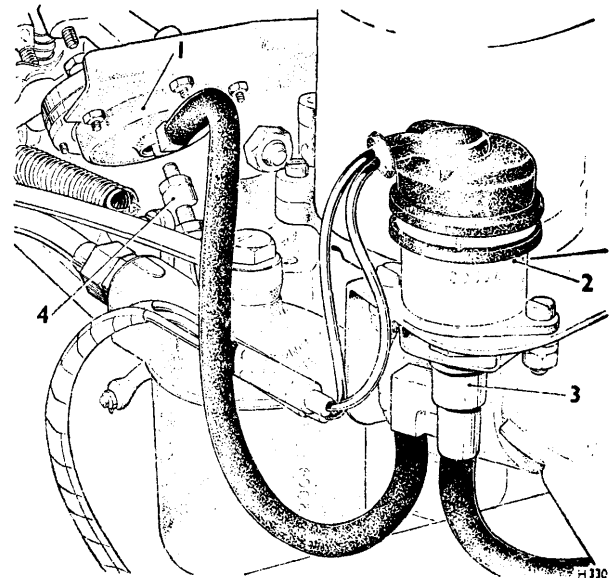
VACUUM OPERATED FAST-IDLE ARRANGEMENT
